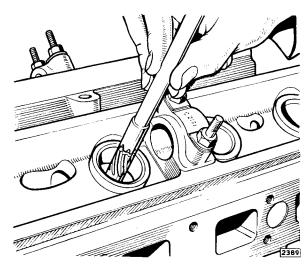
Reaming the bores in the cylinder head with special tool Part No. J.18 to take service replacement valve guides.
